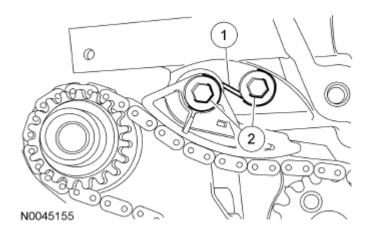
Identifying Oil Pump Chain Drive Tensioner
